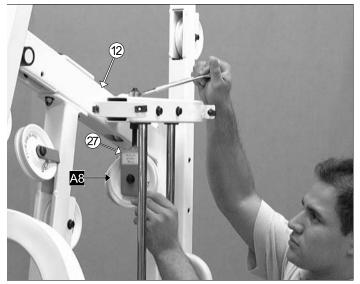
Maneuver the two Guide Rods 3/4 X 72 (#16) into the hole on the bottom side of the Guide Rod Retainer Housing (#22). Nex mount the Guide Rod Retainer Housing (#22) along with the two captiv Guide Rods 3/4 X 72 (#16) to the side of the Top Pulley Assembl (#12). Secure this assembly using two Hex Head Cap Screws 3/8-16 X (#112), four Flat Washers SAE 3/8" (#87), and two Nylon Insert Lock Nut 3/8-16 (#92).
